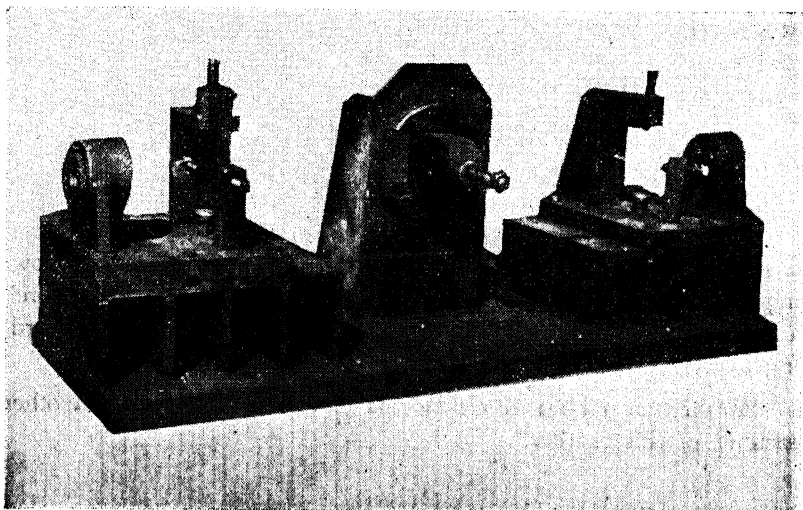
Boring fixture for axle, built by arc welding. Weighs 444 lbs. less, costs \$63.70 less, built in 32 hours less than cast construction.
